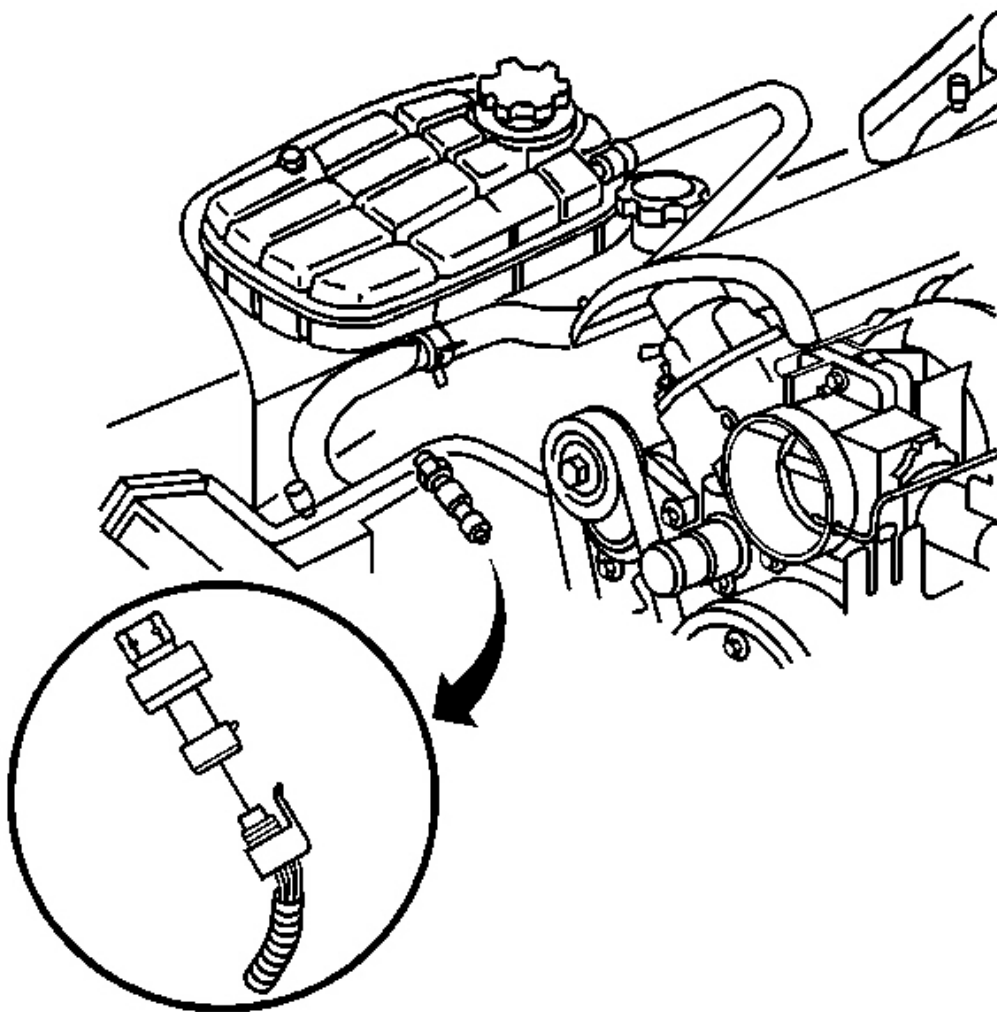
Refrigerant Pressure Sensor & Electrical Connector
